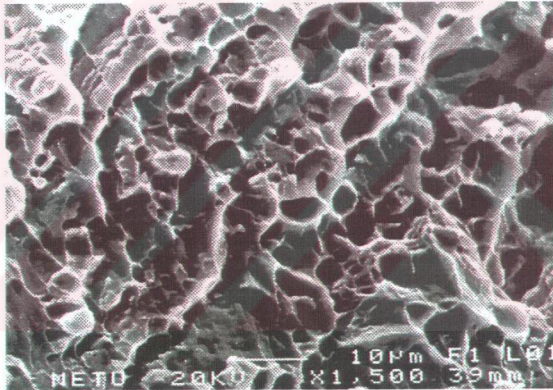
Fracture surface of Al-5%Cu
